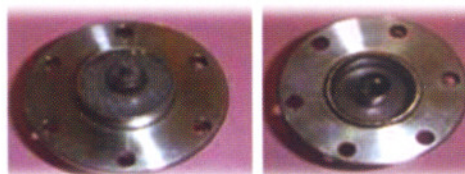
Coaxial glass to metal feed through with mounting flange
